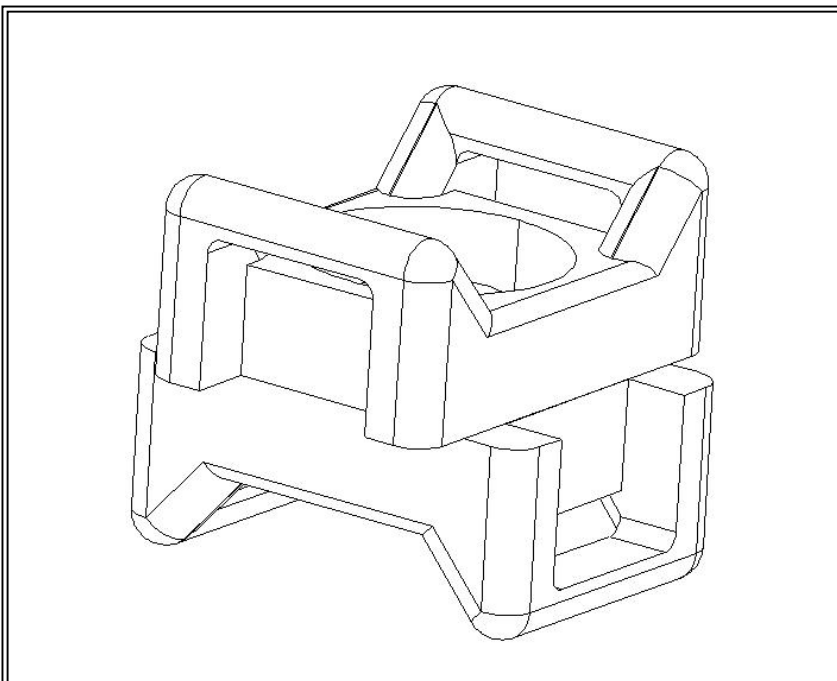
4077219C1 - Cable Lock Swivel Guide
